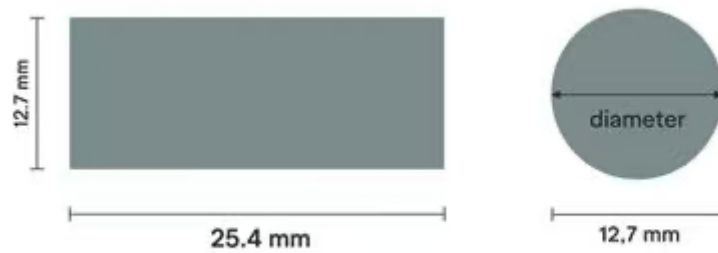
2 (b) ASTM D695 Cylinder Specimen
